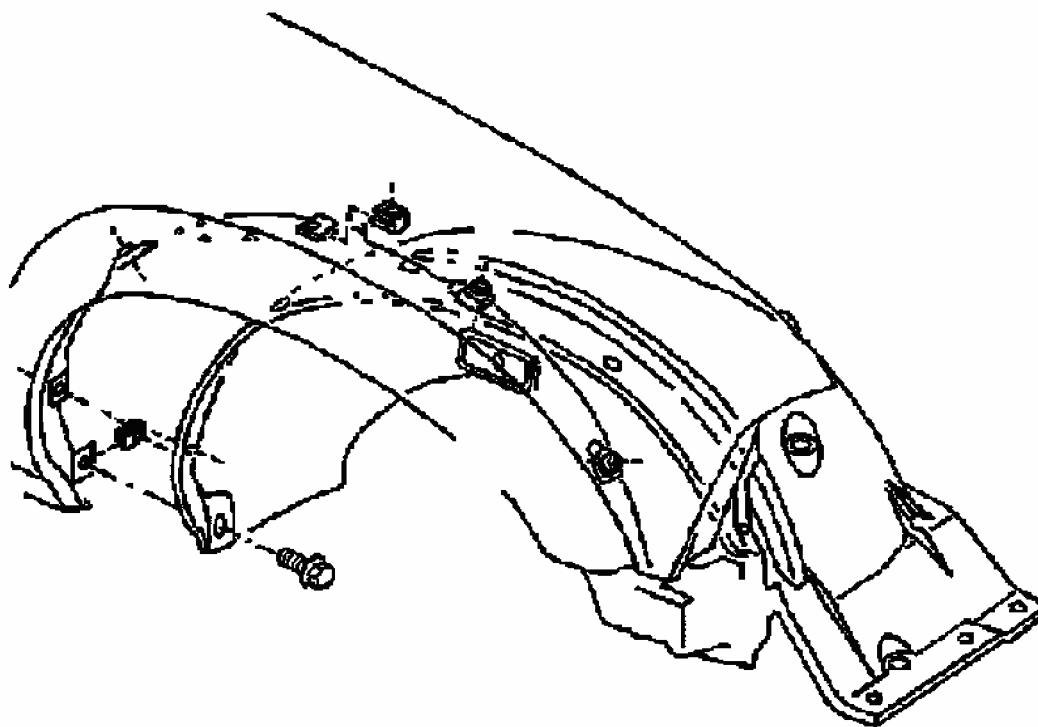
Identifying Service Access Cover & Mounting Screws
